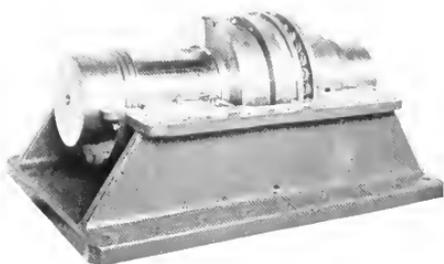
Spring Thrust Bearing Showing Method of Attaching Rotating Ring of Bearing to the Shaft
